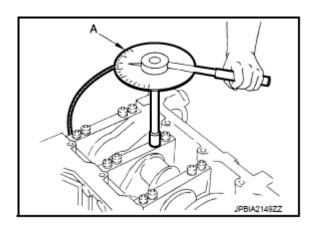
Checking Tightening Angle Using Angle Wrench Courtesy of NISSAN NORTH AMERICA, INC.
